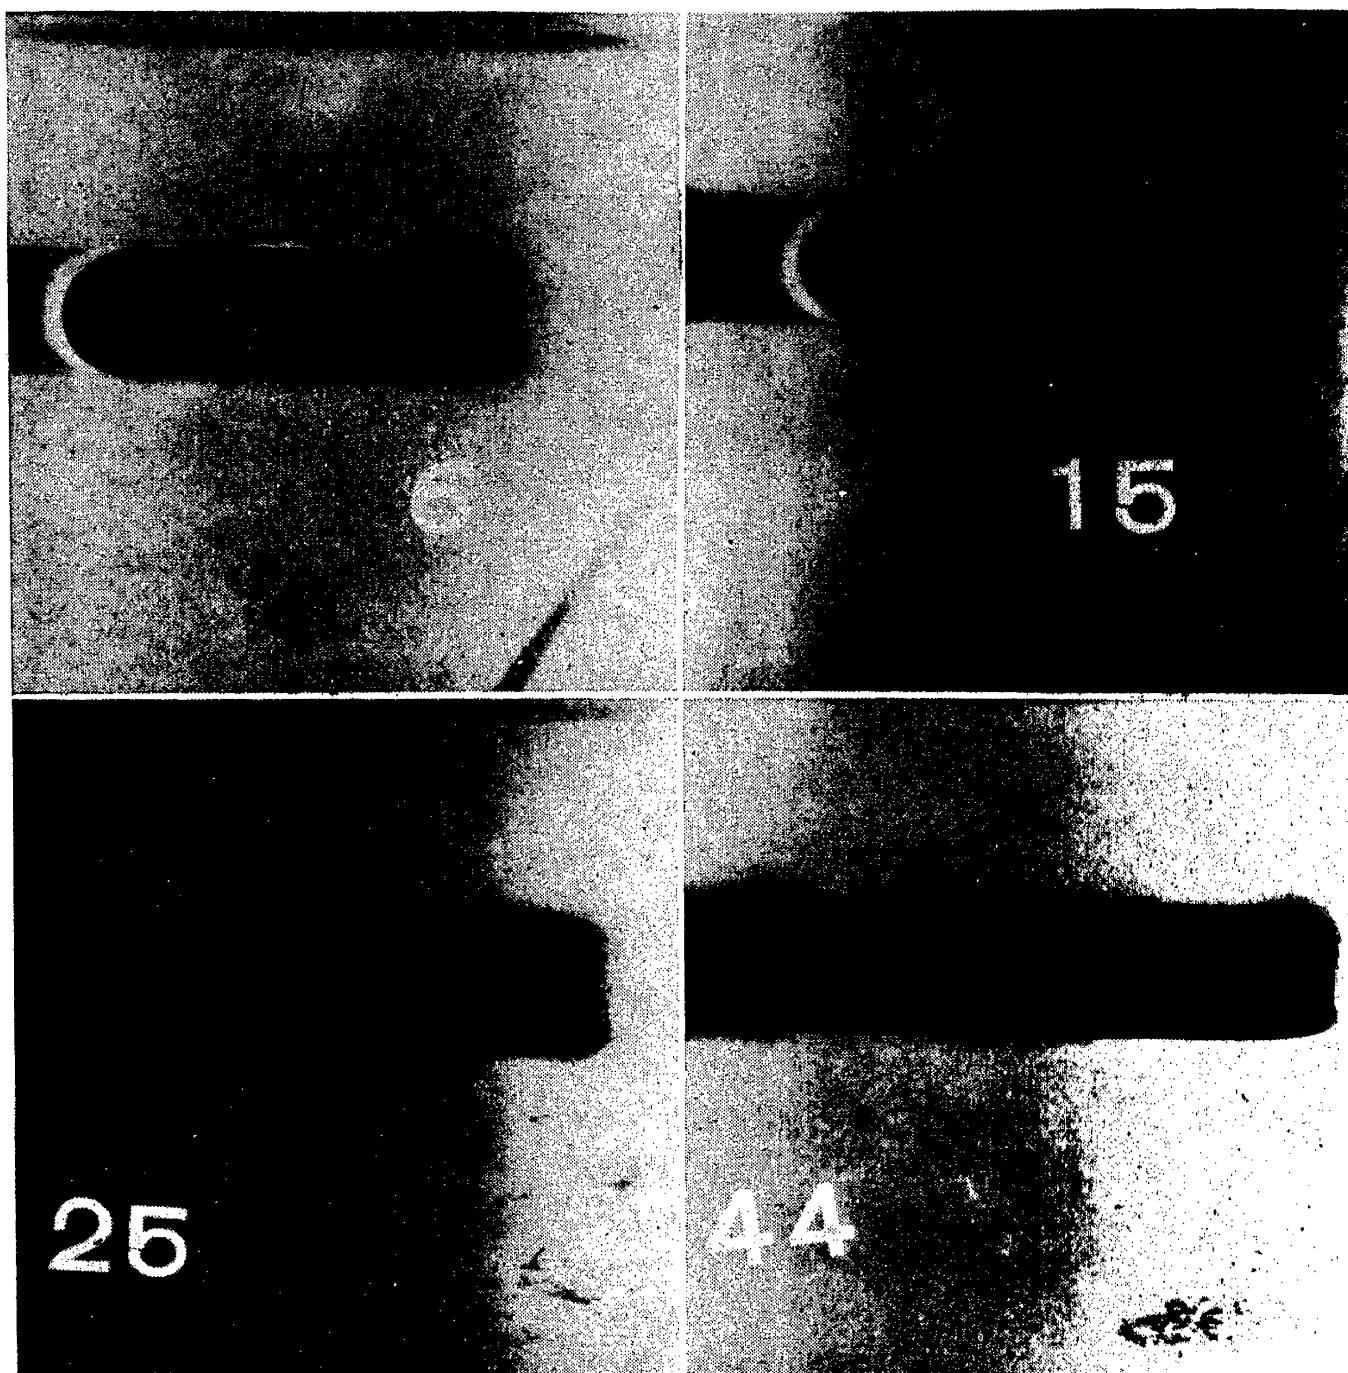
Shrinkage cavities in cast-iron valve sleeves.
